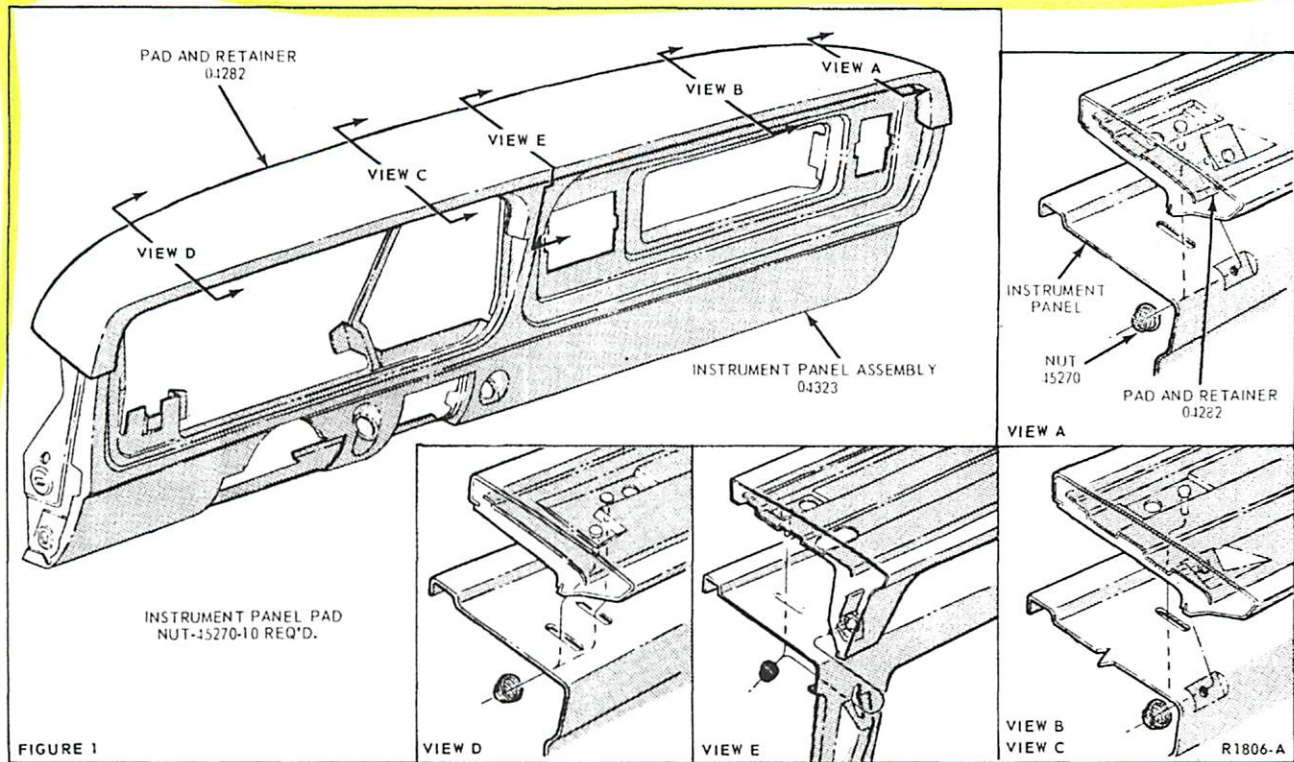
Instrument Panel Pad Installation—F-100 Through F-350
